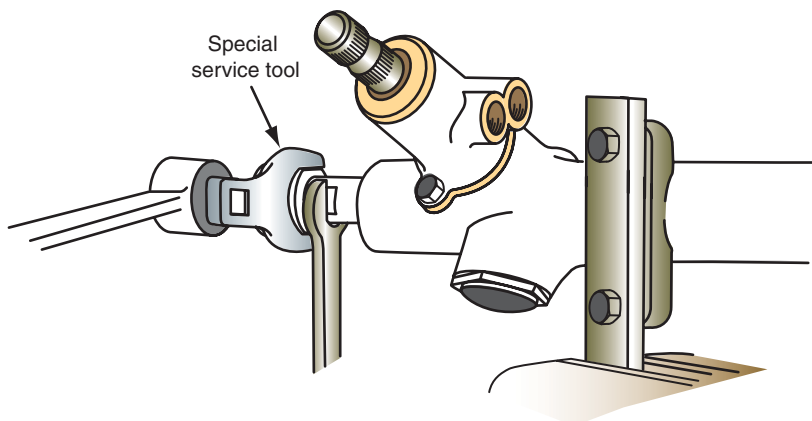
Adjusting pinion shaft turning torque.
